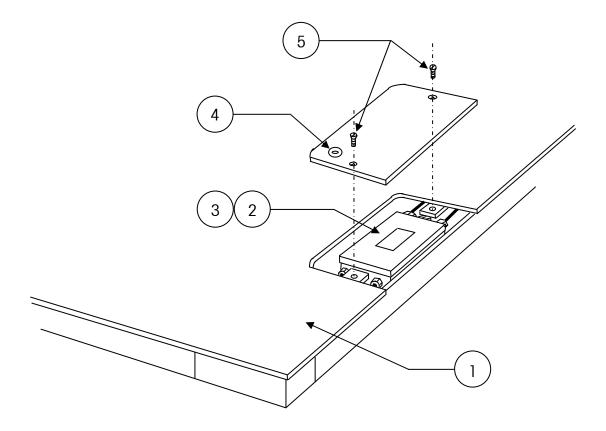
Platform and Junction Box Assembly (22563XXXXX-A)
